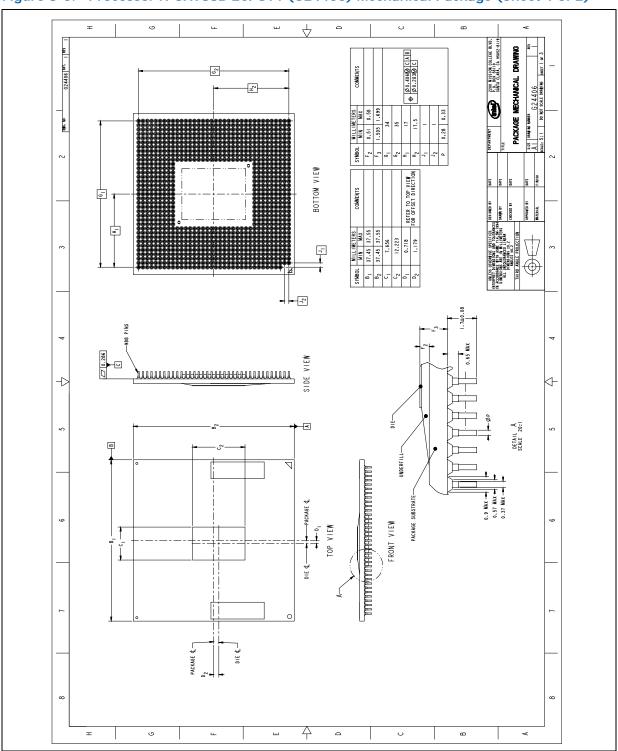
Processor rPGA988B 2C/GT1 (G24406) Mechanical Package (Sheet 2 of 2)
